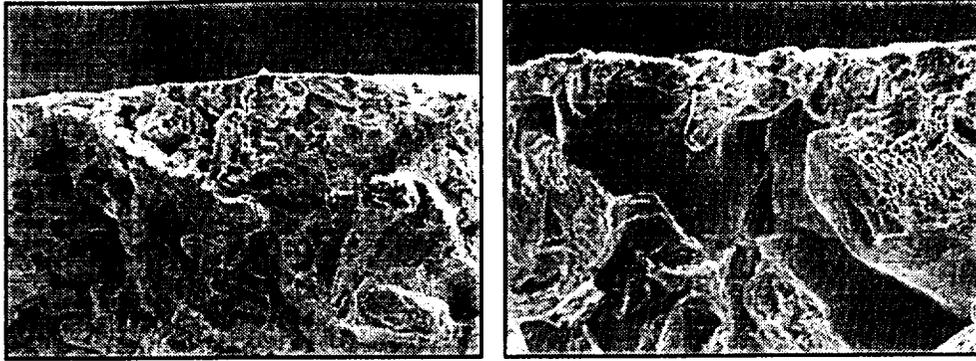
Fracture Analysis of pre-HIP and Homogenization Specimen (L Sample) Reveals Extensive Presence of Voids Due to Casting Shrinkage. The View on the Right is Magnified at 750X
